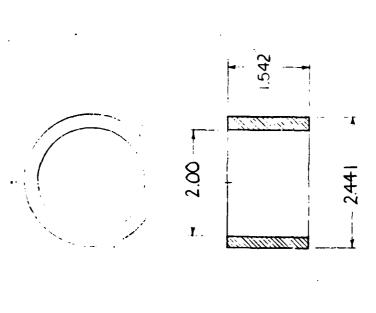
Bearing Block Mounting Bracket for Azimuth Axis
